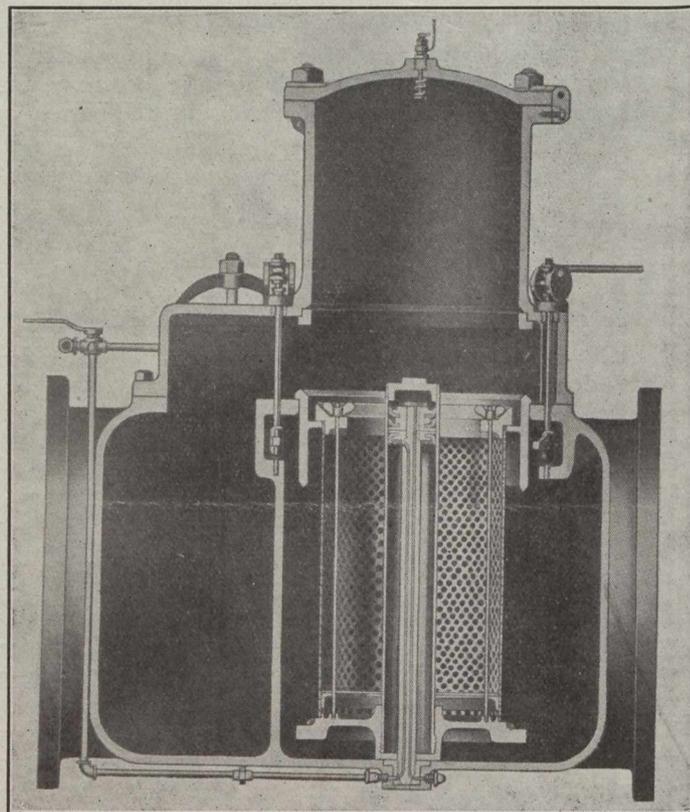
Section Through End Basket, Showing Cylinder and Control Valve.
